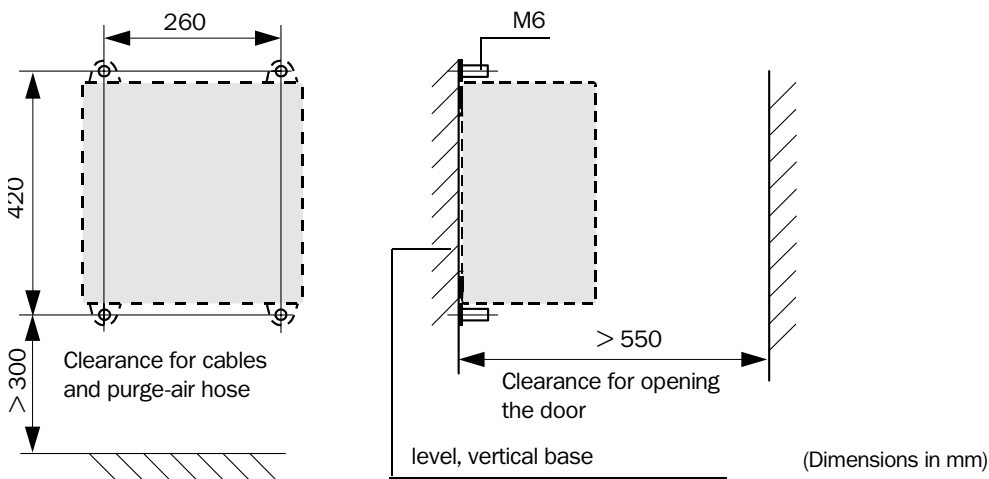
Mounting dimensions for the purge-air unit in connection box
